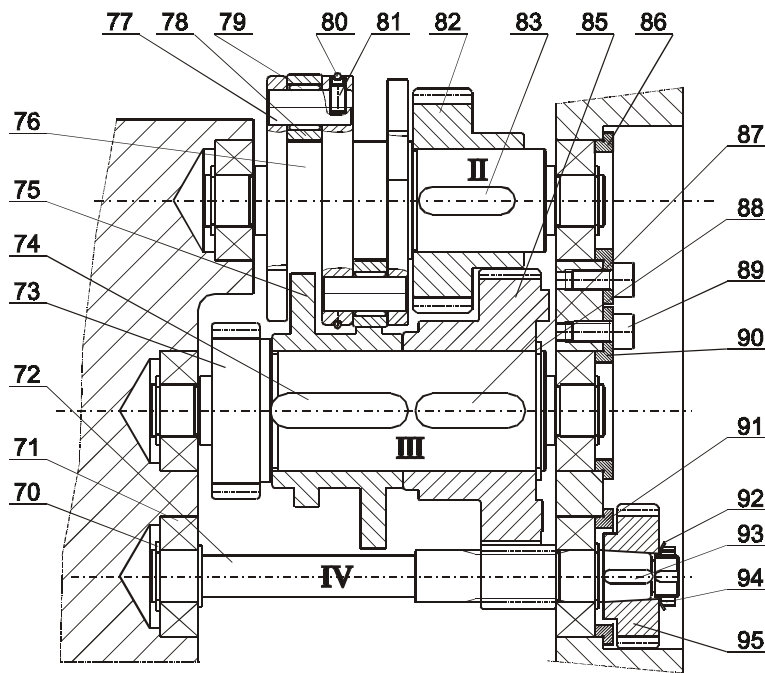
A INDEXING DRIVE (BTP-80, BTP-63)
